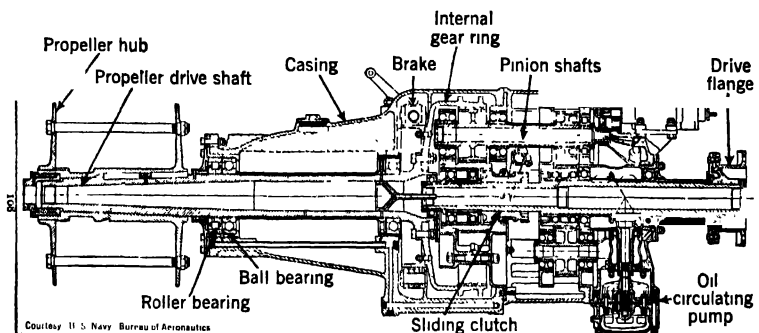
Sectional View Showing Construction of Planetary Speed Reduction and Reverse Gearing Used with Dirigible Airship Engines to Turn Propellers in Either Direction Without Reversing Engine.
